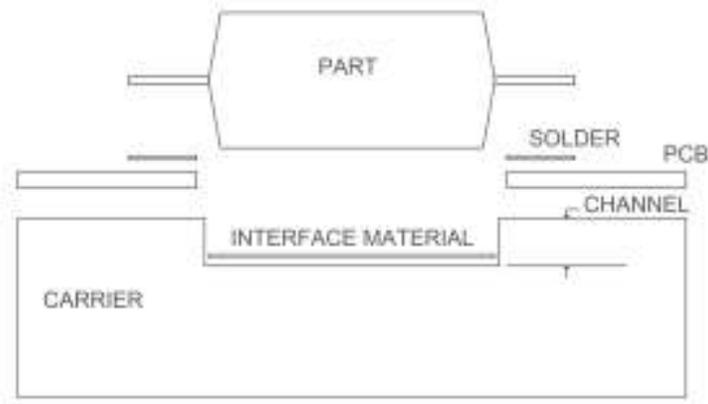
TO-272 package, PCB, and carrier (heatsink) stack-up. Leads of package make electrical connections to the top of PCB while the bottom of package is in direct contact with the carrier to extract heat from the device.
